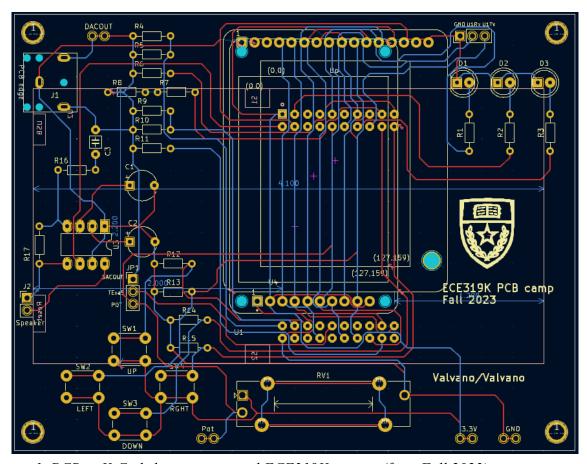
PCB in KiCad showing a typical ECE319K project (from Fall 2023).
